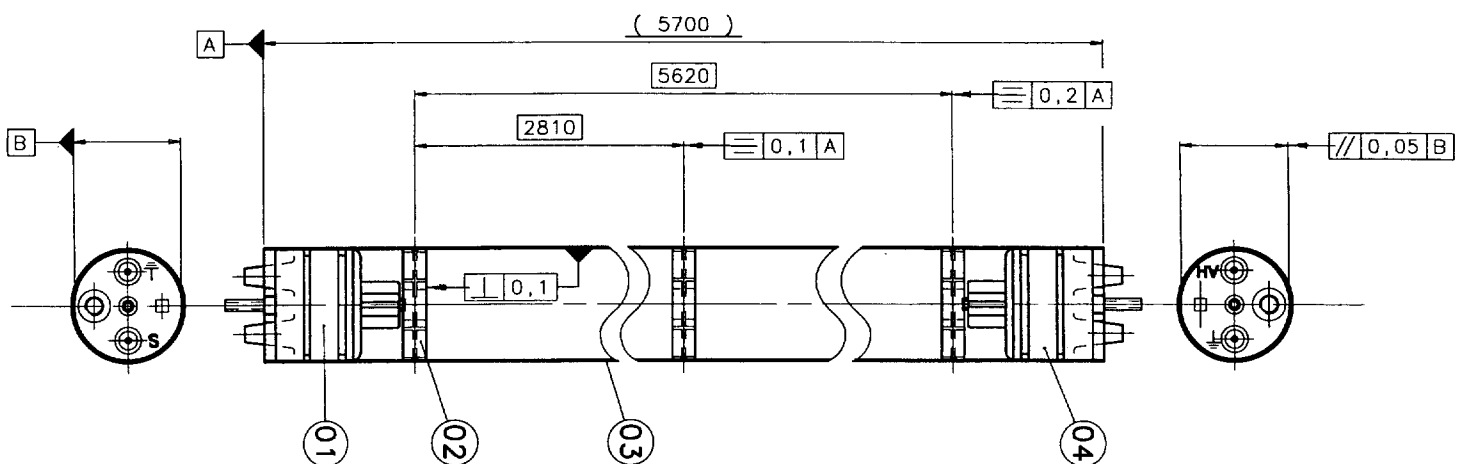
Engineering drawing of a long MDT for the BOL prototype.
